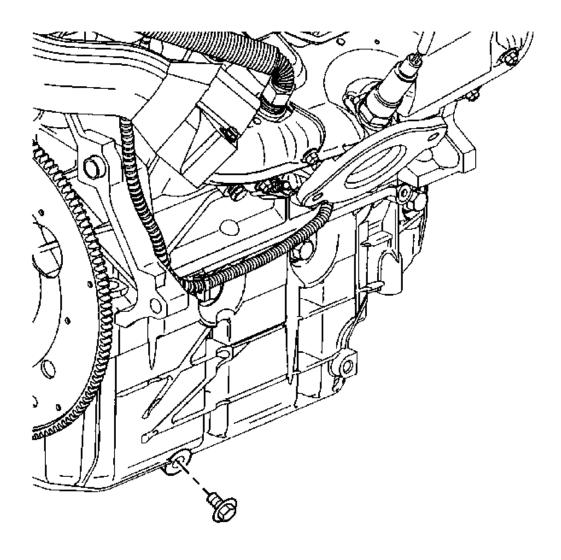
View Of Engine Oil Drain Plug Courtesy of GENERAL MOTORS CORP.
